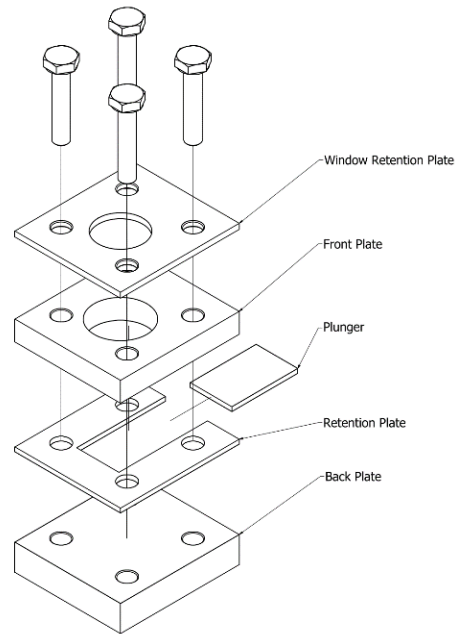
Exploded assembly view of the test section used during the Asay shear tests.
